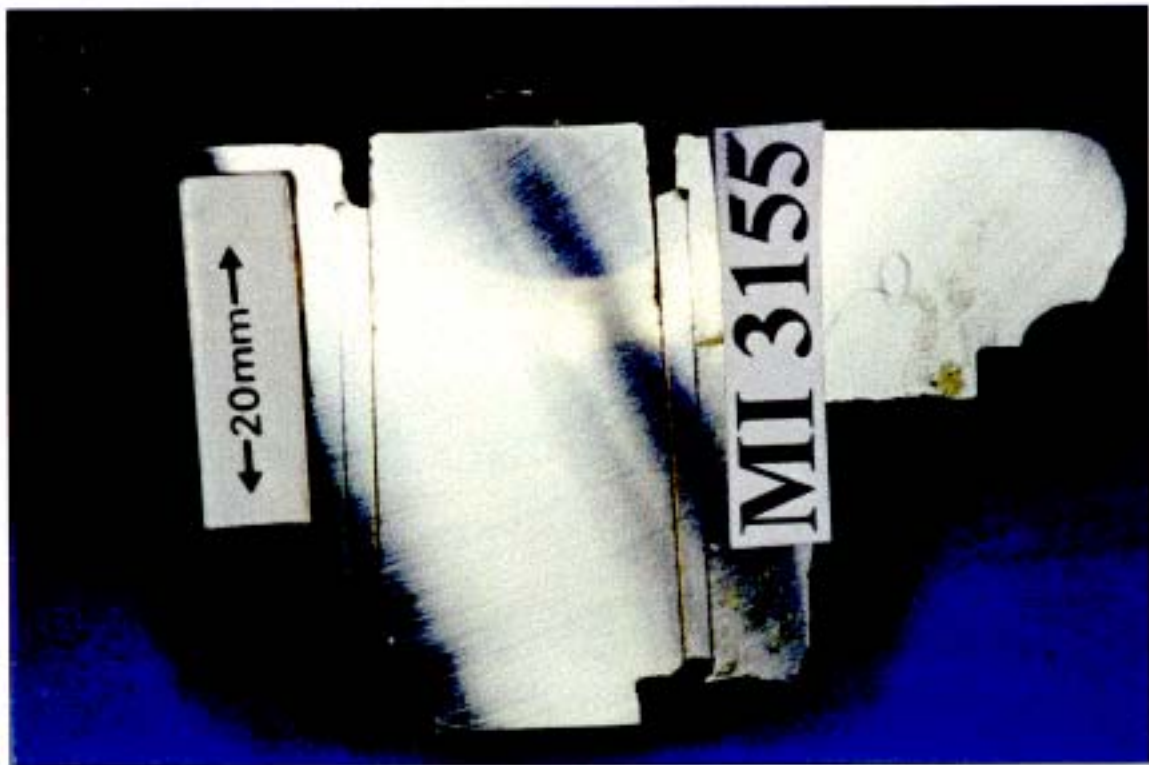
Aft side spindle to guide interface - off centre longitudinal section
